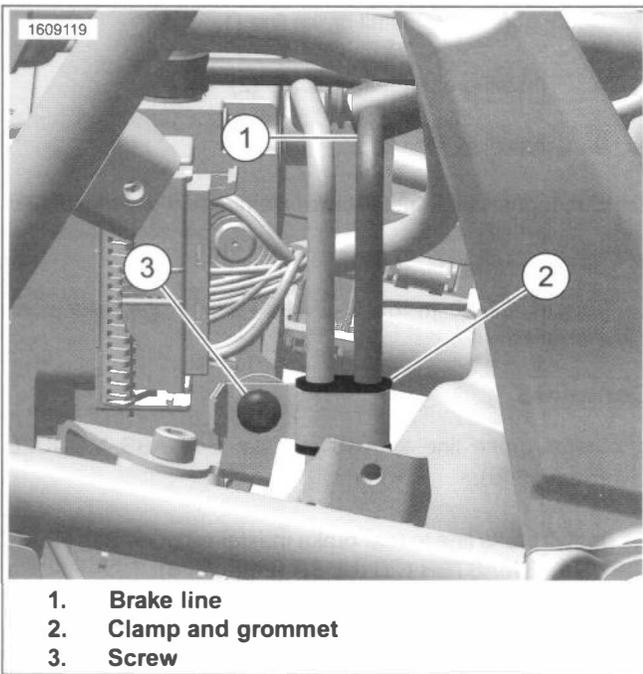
ABS Module to Rear Master Cylinder Brake Line Lower Clamps
